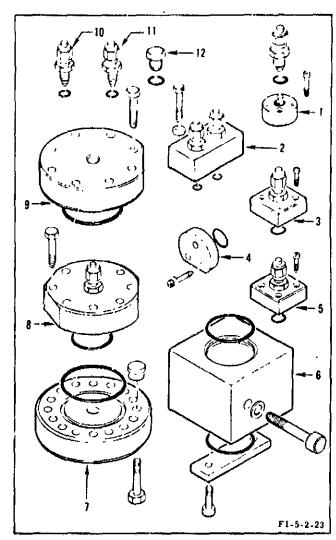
Pressure Test Fixture T-5029360 (Sheet 1 of 2)
